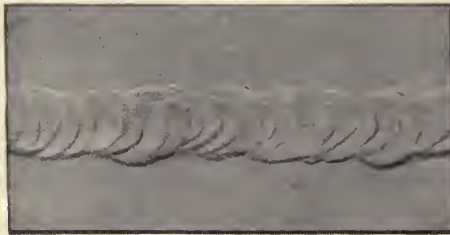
Aluminium weld executed by an experienced workman.
